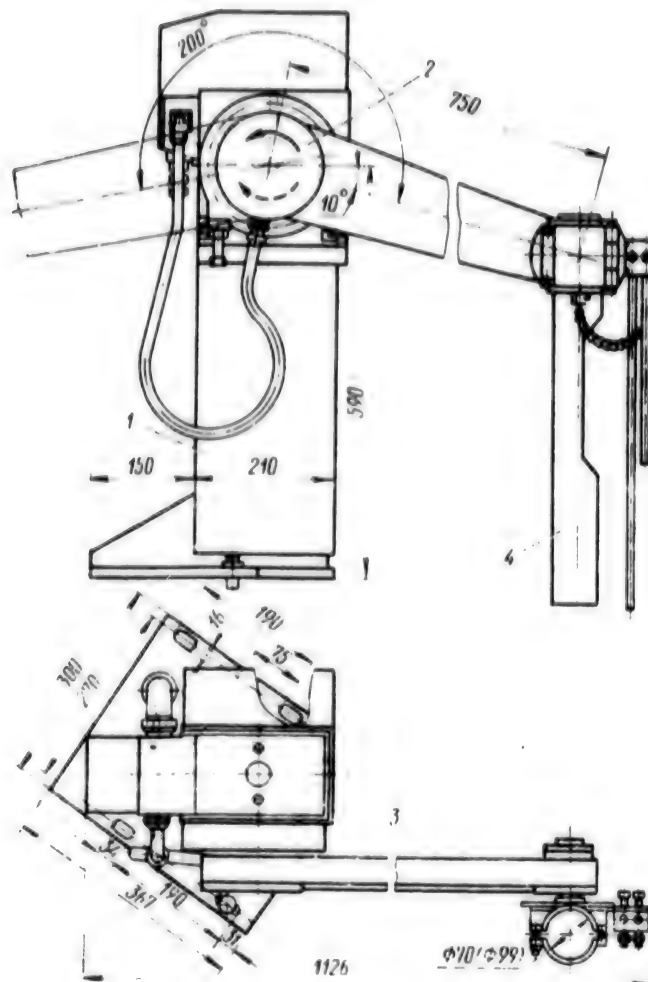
LM20Ts82.05 Pouring Manipulator
